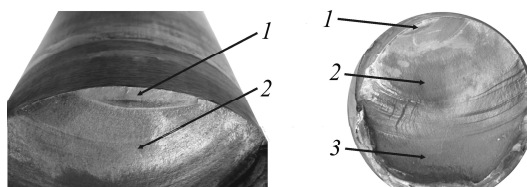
Fracture surfaces of both corresponding parts of destroyed railway wheel axle: 1, 2 – areas of initiation and growth of fatigue crack; 3 – rupture area.
